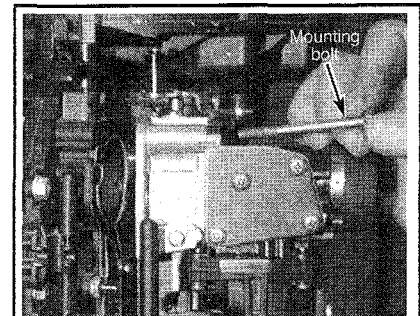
When installing carb bodies onto the throttle plate, take care not to disturb the preformed seal
